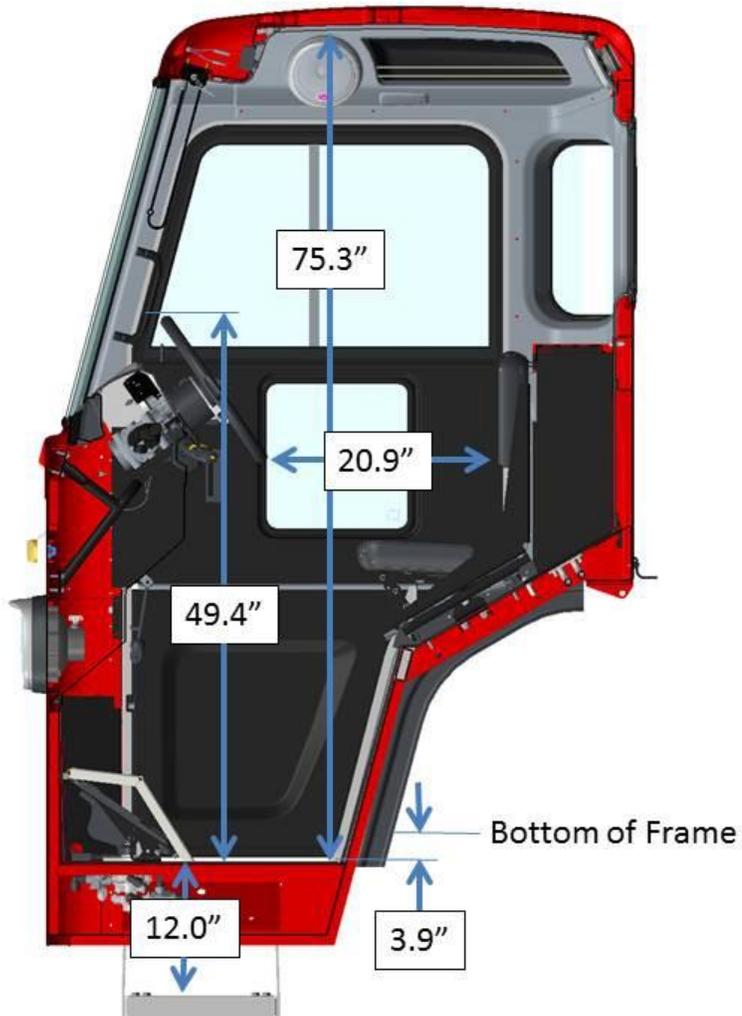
View Looking Through the Cab At The RH Drive Standup Version
